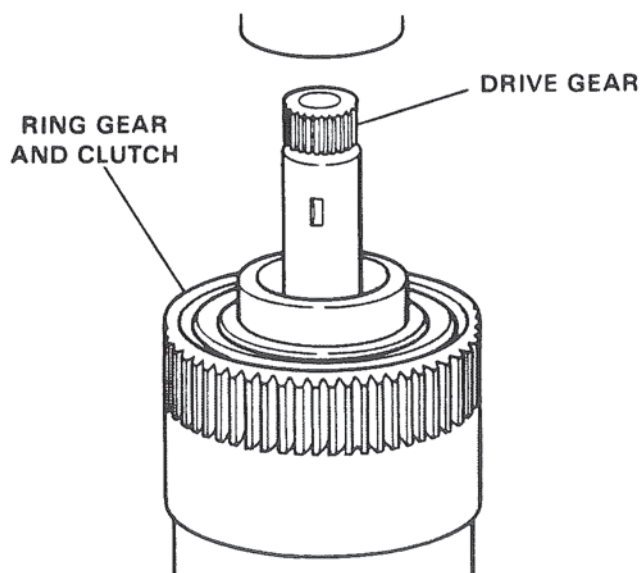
Assembling Ring Gear and Clutch Assembly onto Drive Gear.
